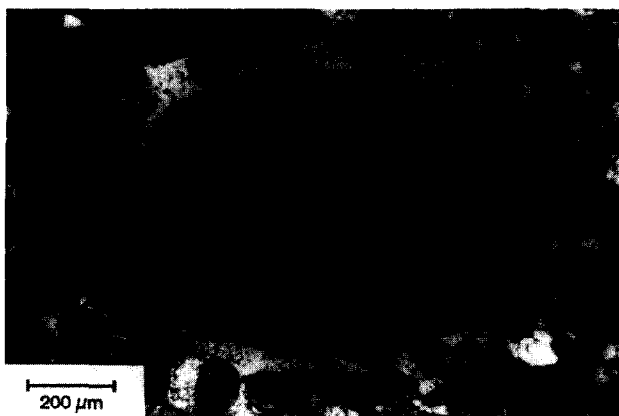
Vacuum bubble and the β -phase grown on its surface in an extrusion weld (melt temperature: 240°C , welding rate: 4 mm s^{-1})
